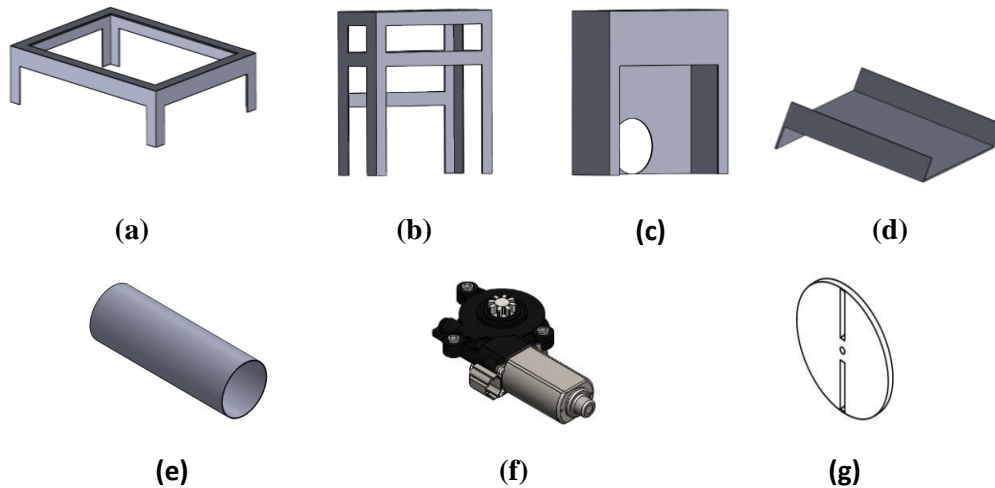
Machine main component (a) Base (b) Frame (c) Housing (d) Slide (e) Input Tunnel (f) 12V Dc Motor (g) Slicing blade
